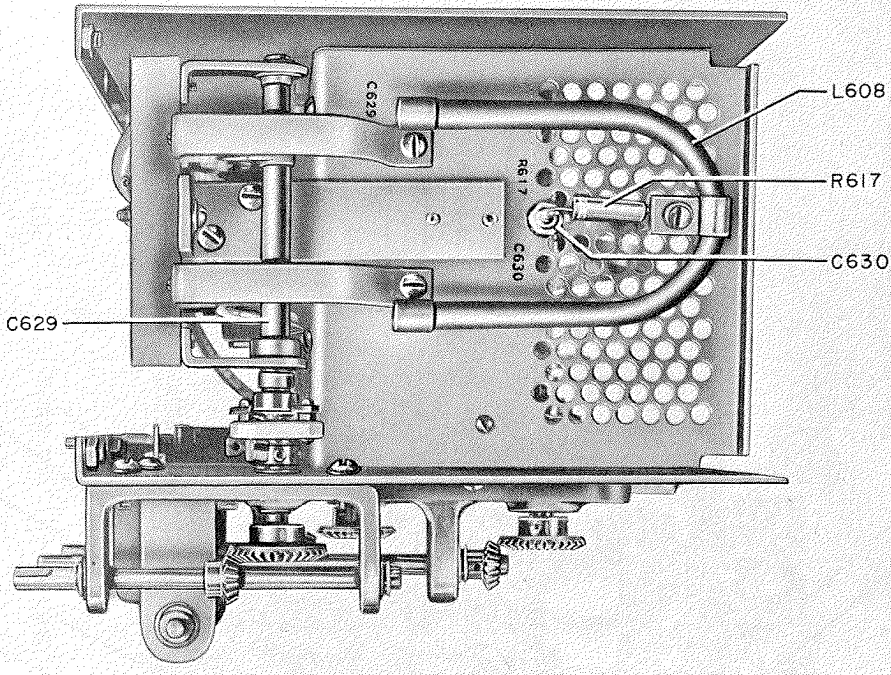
Radio Transmitter, End View of Exciter Subassembly with Cover Removed, Location of Electrical Parts
